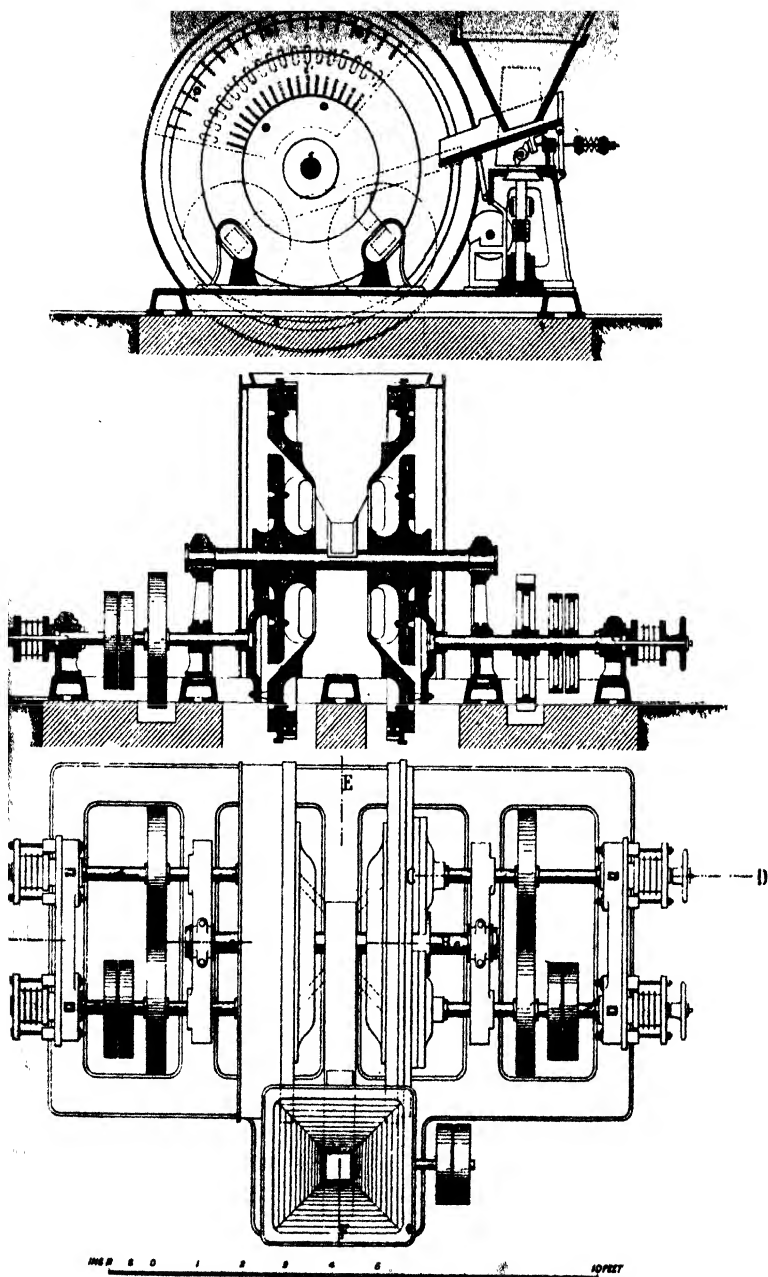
Heberle mill. Vertical section, plan and side elevation.
